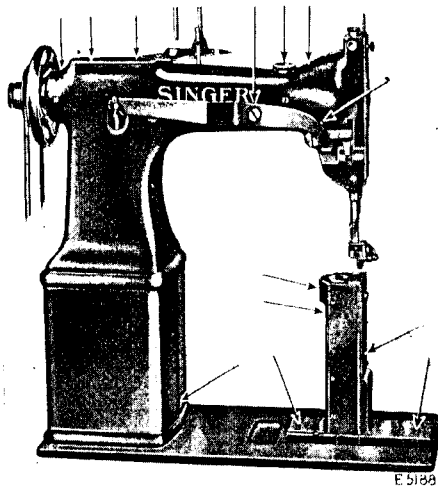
OILING POINTS AT THE BACK OF THE MACHINE
